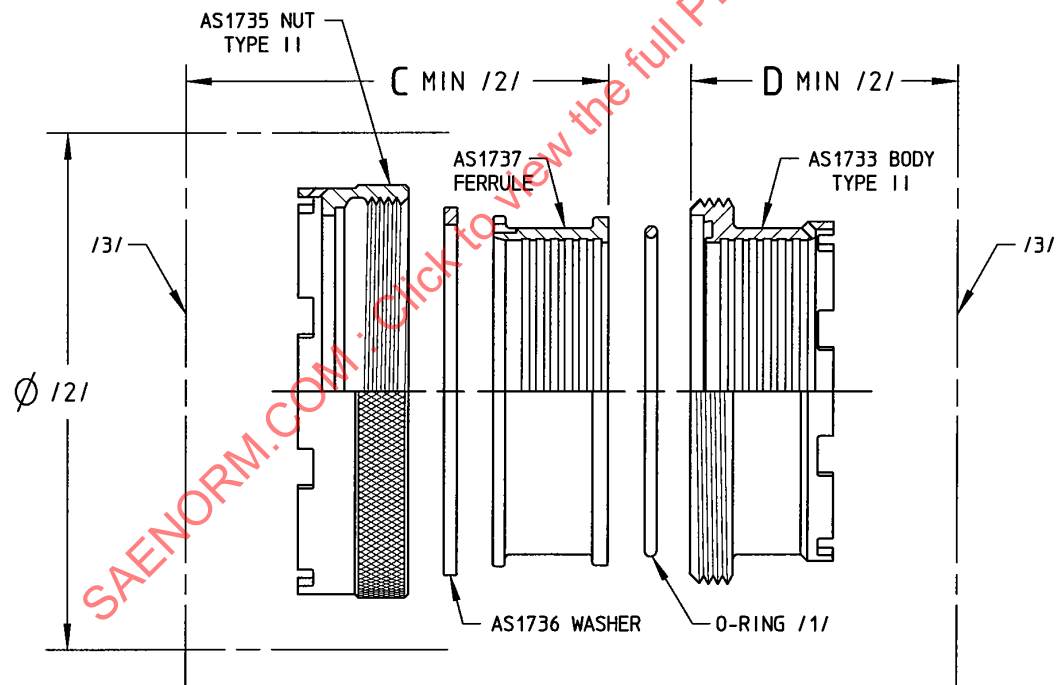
TYPE II COUPLING - EXPLODED VIEW
